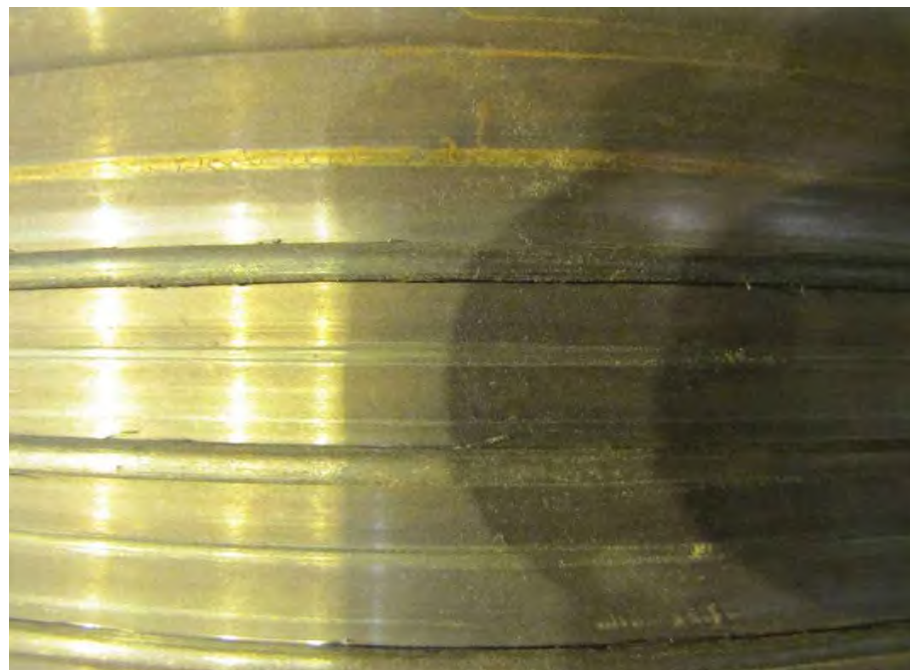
Photograph of high pressure rotor shown in Fig. 12 showing rub damage to interstage seal areas.
